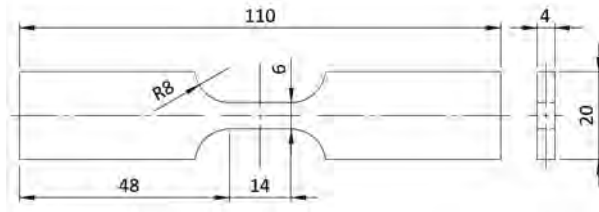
Dimensions, in millimeters, of the SP specimen
